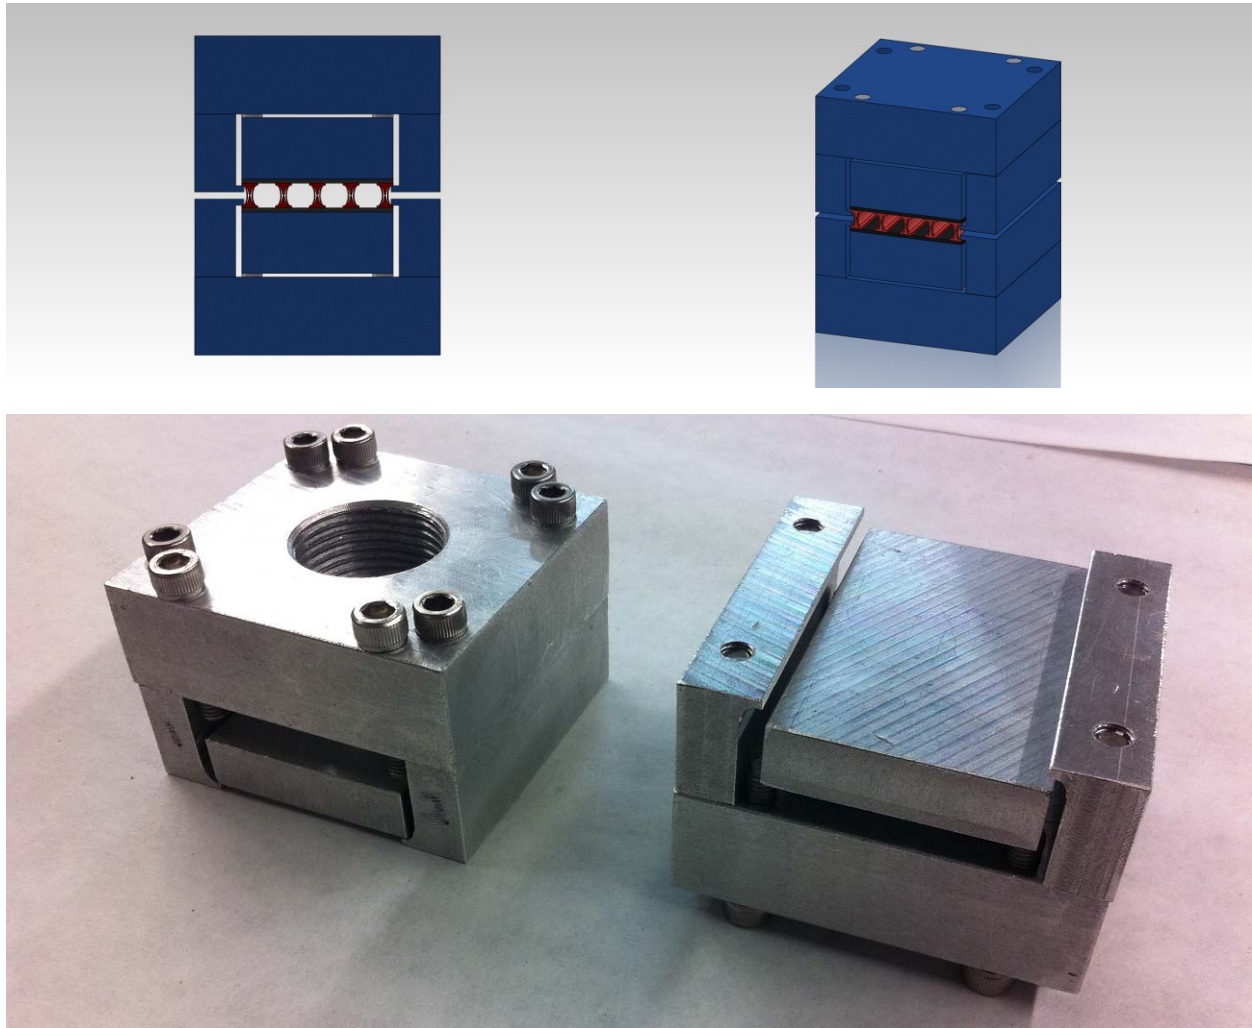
TEES newly designed and manufactured 6LHG array test fixture.
